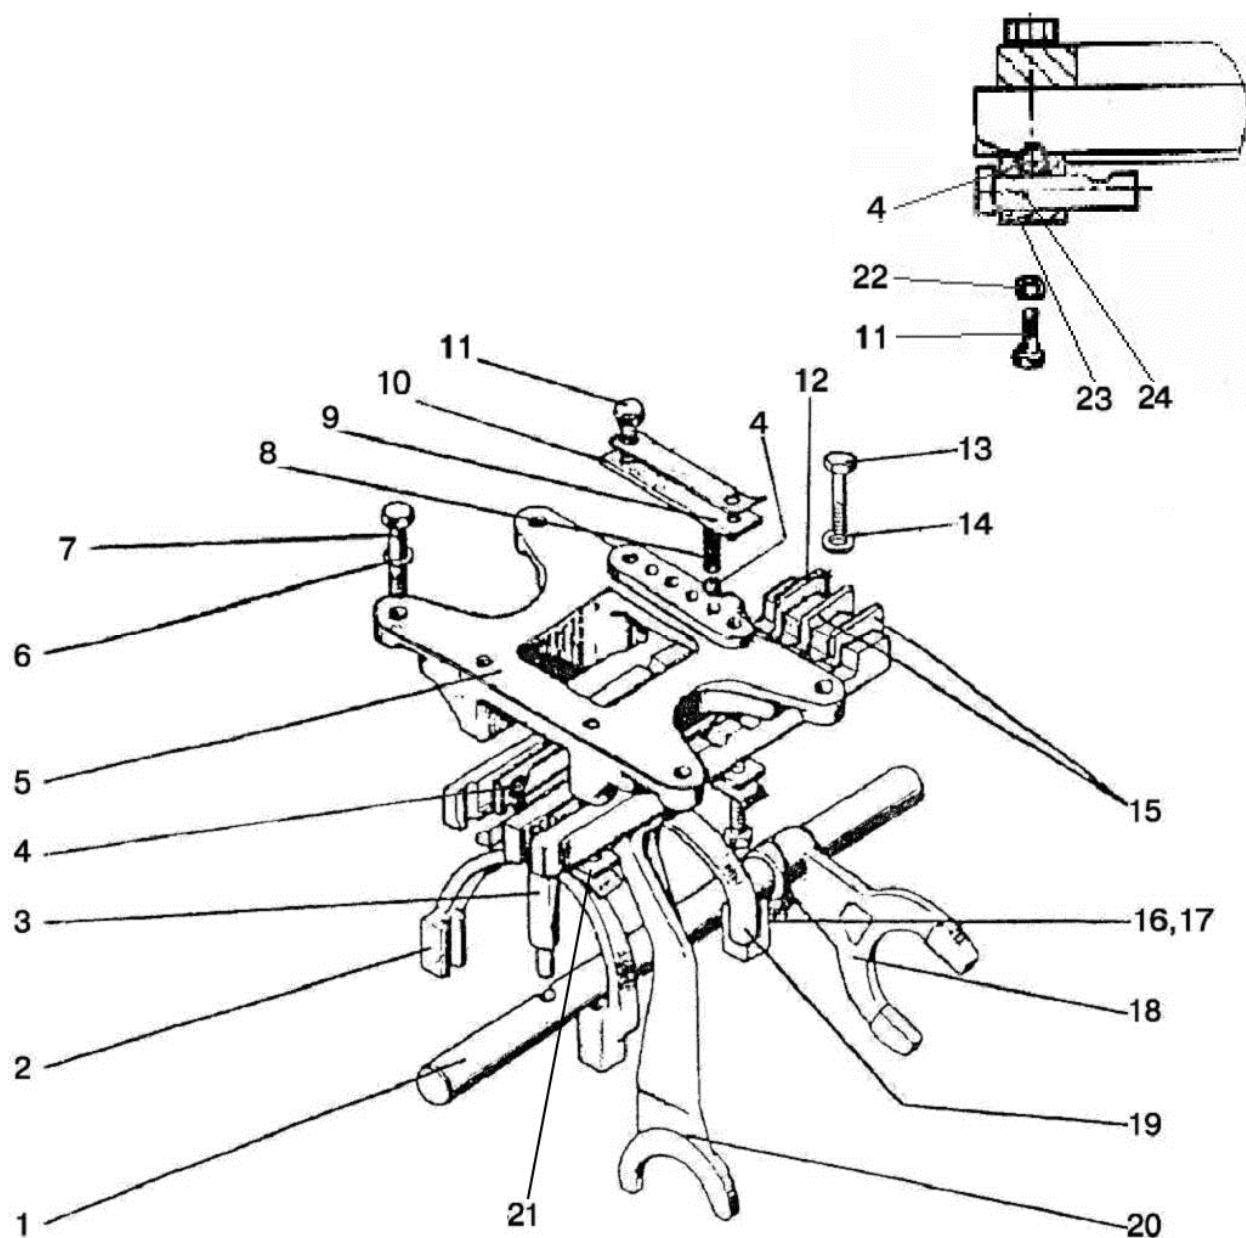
Synchronized gearbox control mechanism. Fork body.
